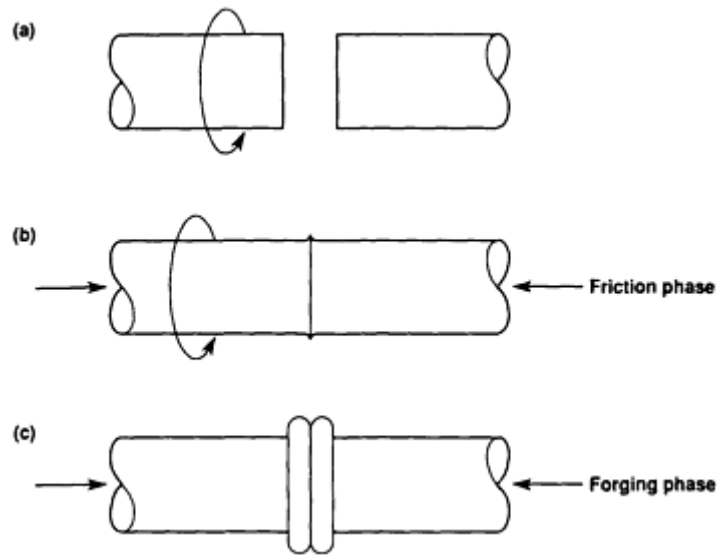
SCHEMATIC SHOWING FUNDAMENTAL STEPS IN THE FRICTION WELDING PROCESS. (A) ONE WORKPIECE IS ROTATED, AND THE OTHER WORKPIECE IS HELD STATIONARY. (B) BOTH WORKPIECES ARE BROUGHT TOGETHER, AND AXIAL FORCE IS APPLIED TO BEGIN THE UPSETTING PROCESS. (C) WORKPIECE ROTATION IS STOPPED, AND THE UPSETTING PROCESS IS COMPLETED
